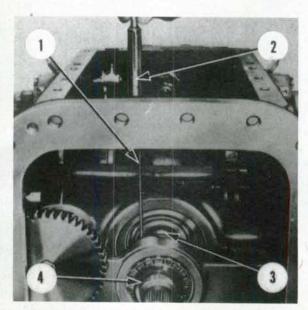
Wrap a cord around bevel pinion shaft and use a pull scale to measure force required to rotate shaft when adjusting bearing preload. Note any numbers (4) marked on pinion shaft when setting bevel pinion mesh position. Refer to text.
